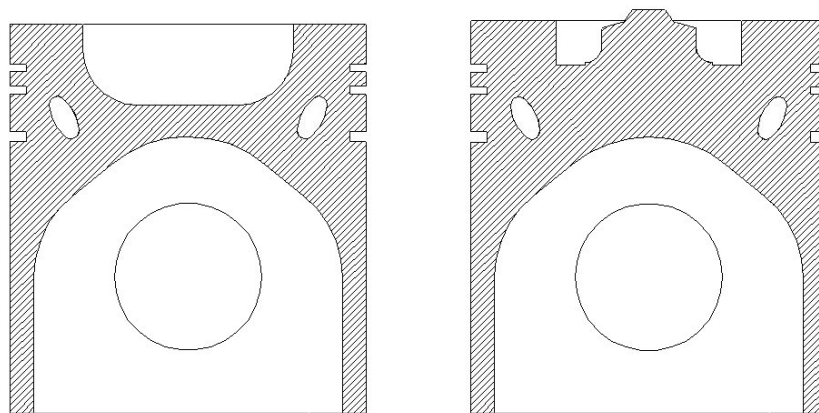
Cross-Sectional Drawings of Stock and Blank Pistons
